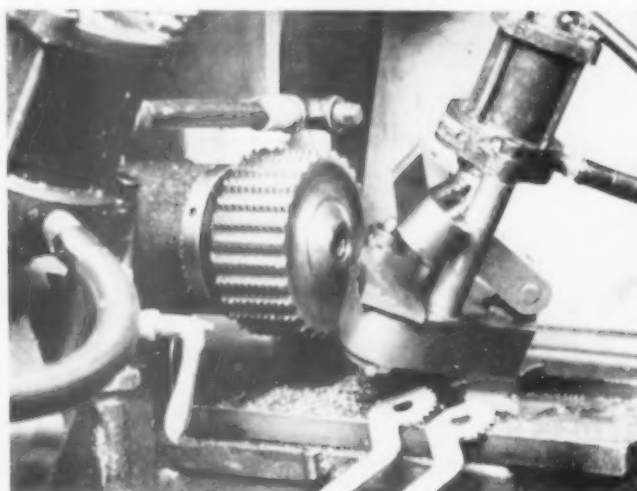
, at right, is a close-up of the parts in position for hobbing. This is the older setup in which the parts were clamped by a floating cam-action clamp. Otherwise it is similar to the later development, by Detroit Hardware Manufacturing Company production executives in cooperation with Michigan Tool Company engineers, in that three parts are hobbled simultaneously. Note the staggered arrangement of the parts to insure that the hobbing starts in the correct location on each part.
